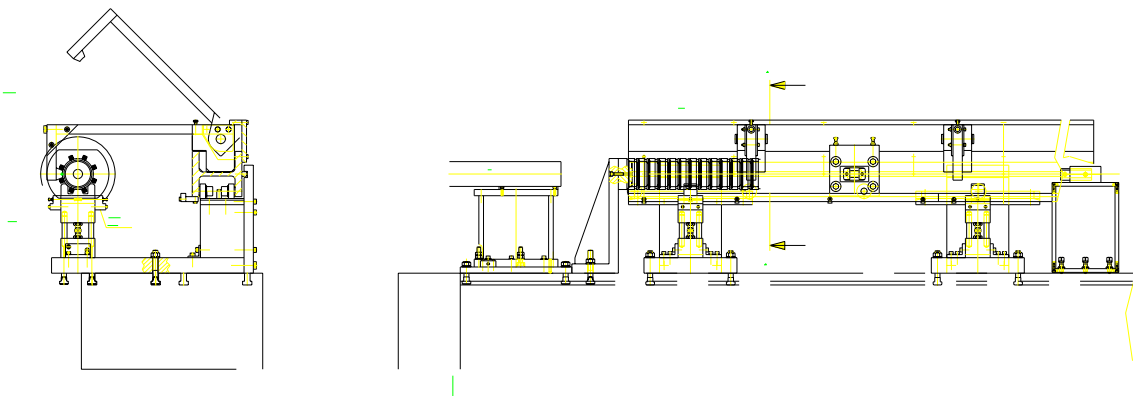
Device for straightening of the accelerating sections after the final braze and before installation on the girder.
